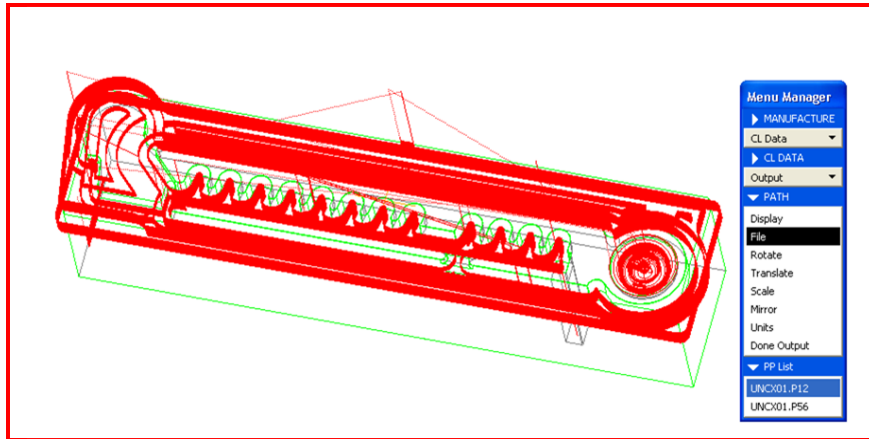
The trajectories of the cutting tools for machining of the tool electrode and the selection of the machine identifier.
